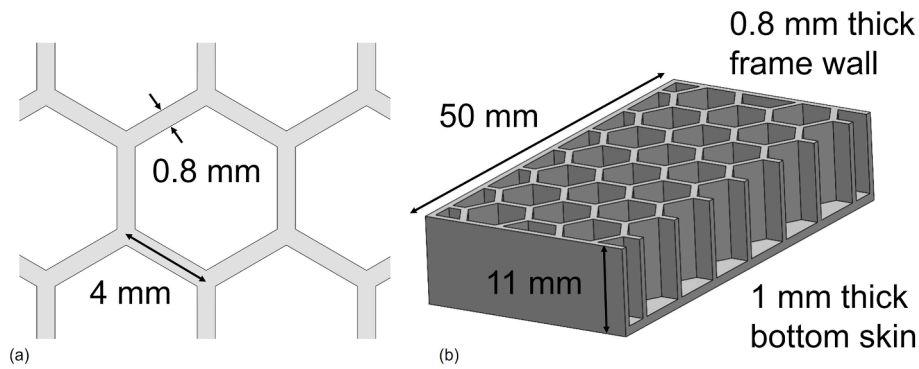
(a) Schematic of the honeycomb core with the single hexagonal cell dimensions and (b) the general sample dimensions.
